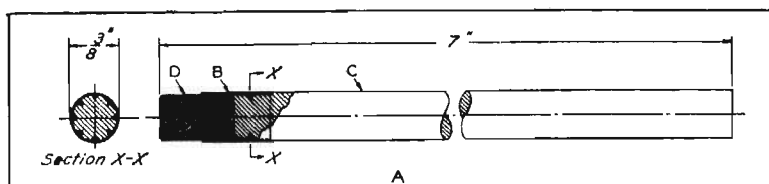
Typical Assembly with Tube B Indented by Mechanism Shown in Fig. 5.
